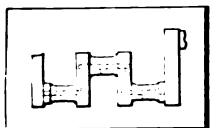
Oil leads in crankshaft used in force feed system where oil is pumped up as far as wrist pin bearings
